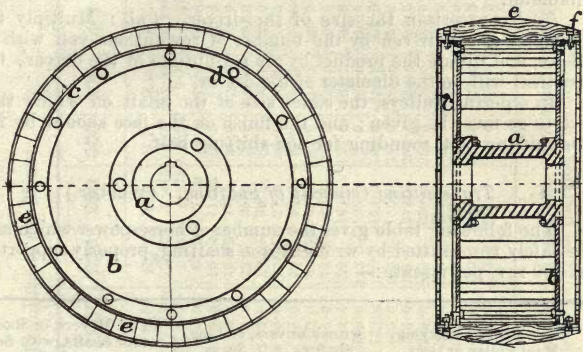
WOODEN PULLEY UNDER 36 IN. DIAM.
